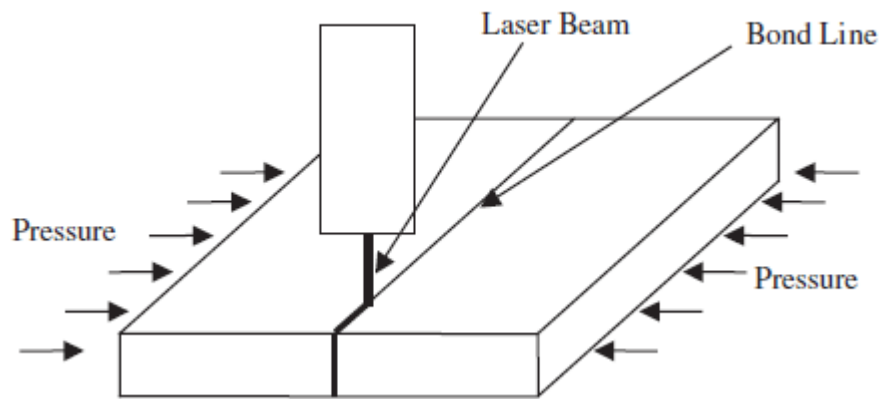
Laser welding of thermoplastic composites [58]
